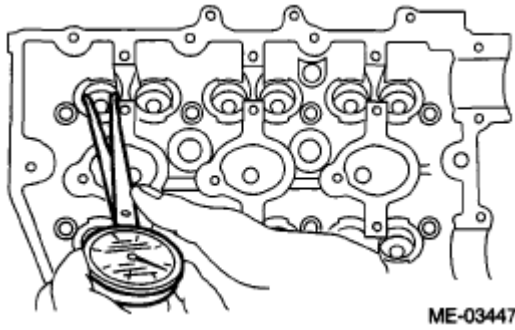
Measuring Inner Diameter Of Valve Lifter Mating Surface On Cylinder Head
